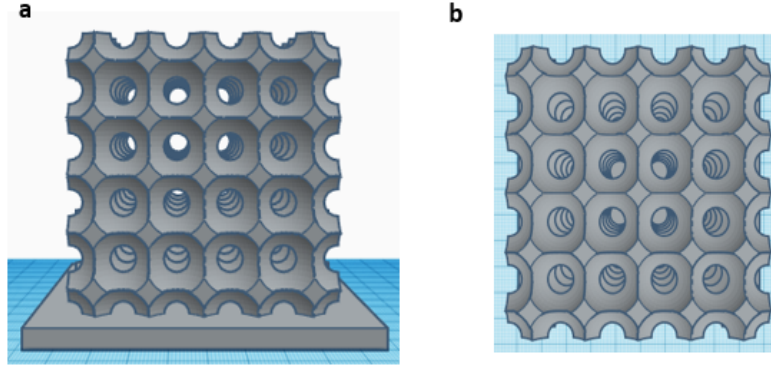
CAD design of scaffold. (a) Side view and (b) top view.
